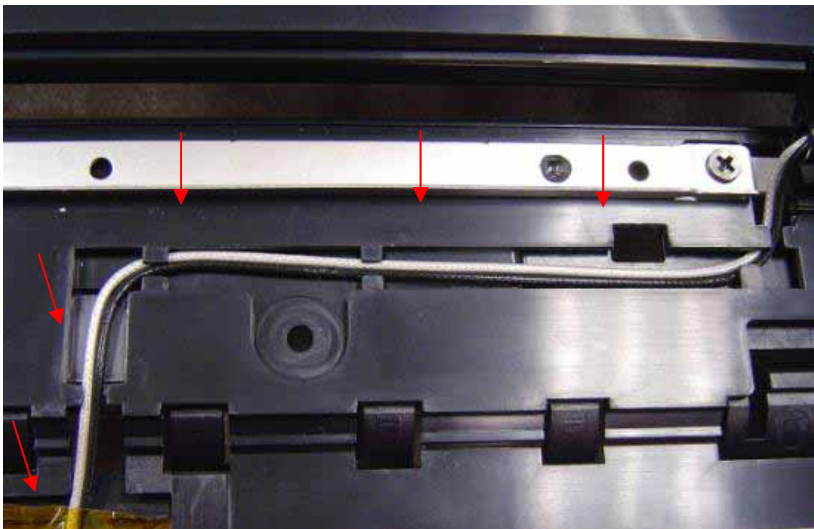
Disconnect 4 cables and remove two hinge covers with screwdriver
